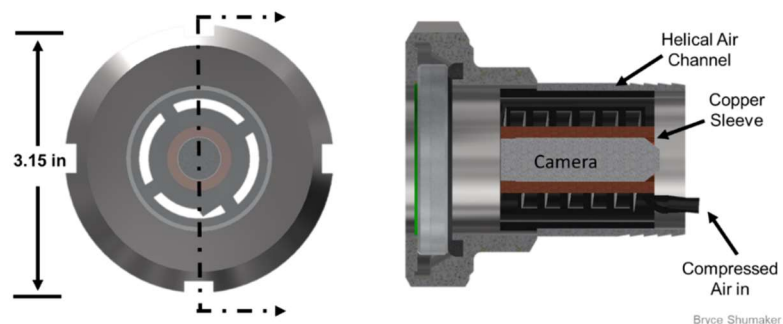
CAD render of camera housing: Left: Front view. Right: Cross section view with highlighted components
